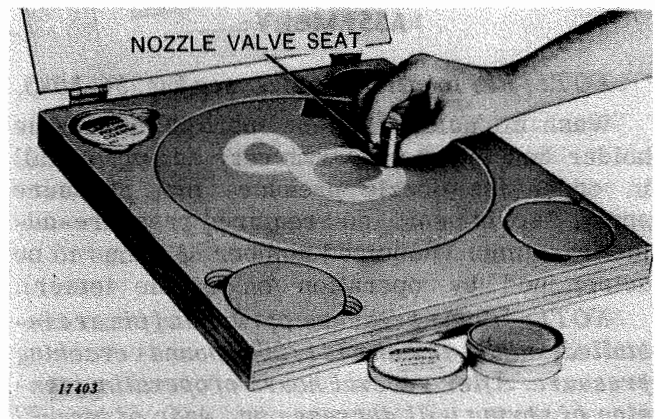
Lapping Flat Surface of Valve Seat
